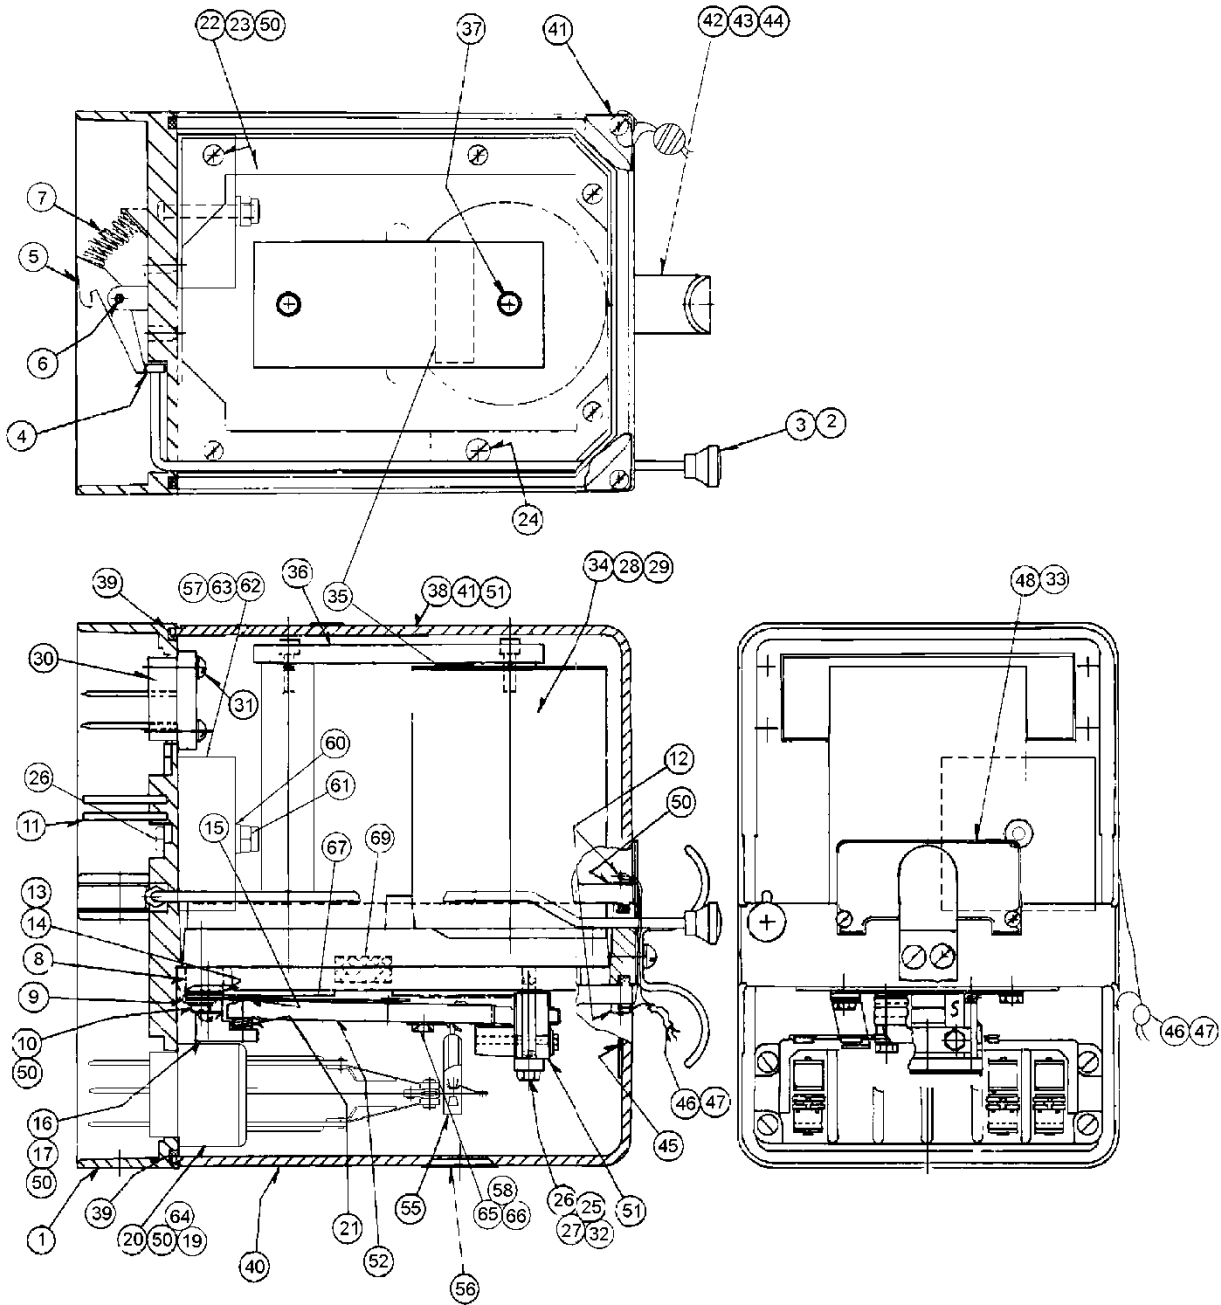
PN-250F Relay with One-Piece Molded Base
